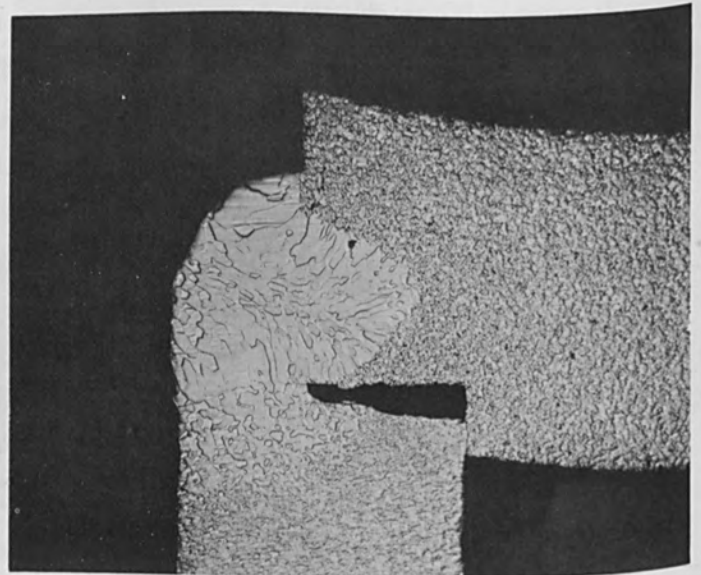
Photomicrograph (75x) of weld cross section (3-in.-diameter annular ionizer)
